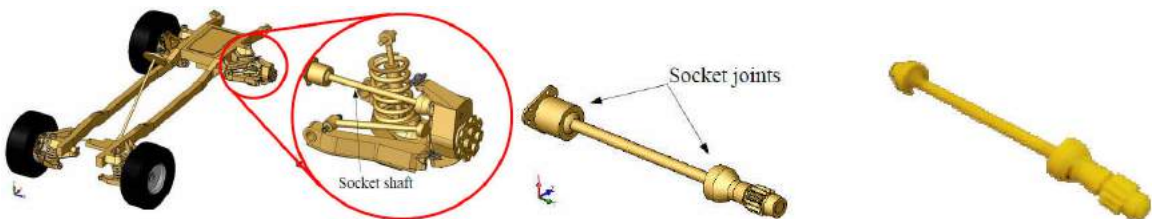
HMMWV suspension and socket shaft: (a) HMMWV suspension in *SolidWorks*, (b) Socket shaft in *SolidWorks*, and (c) Physical model.
